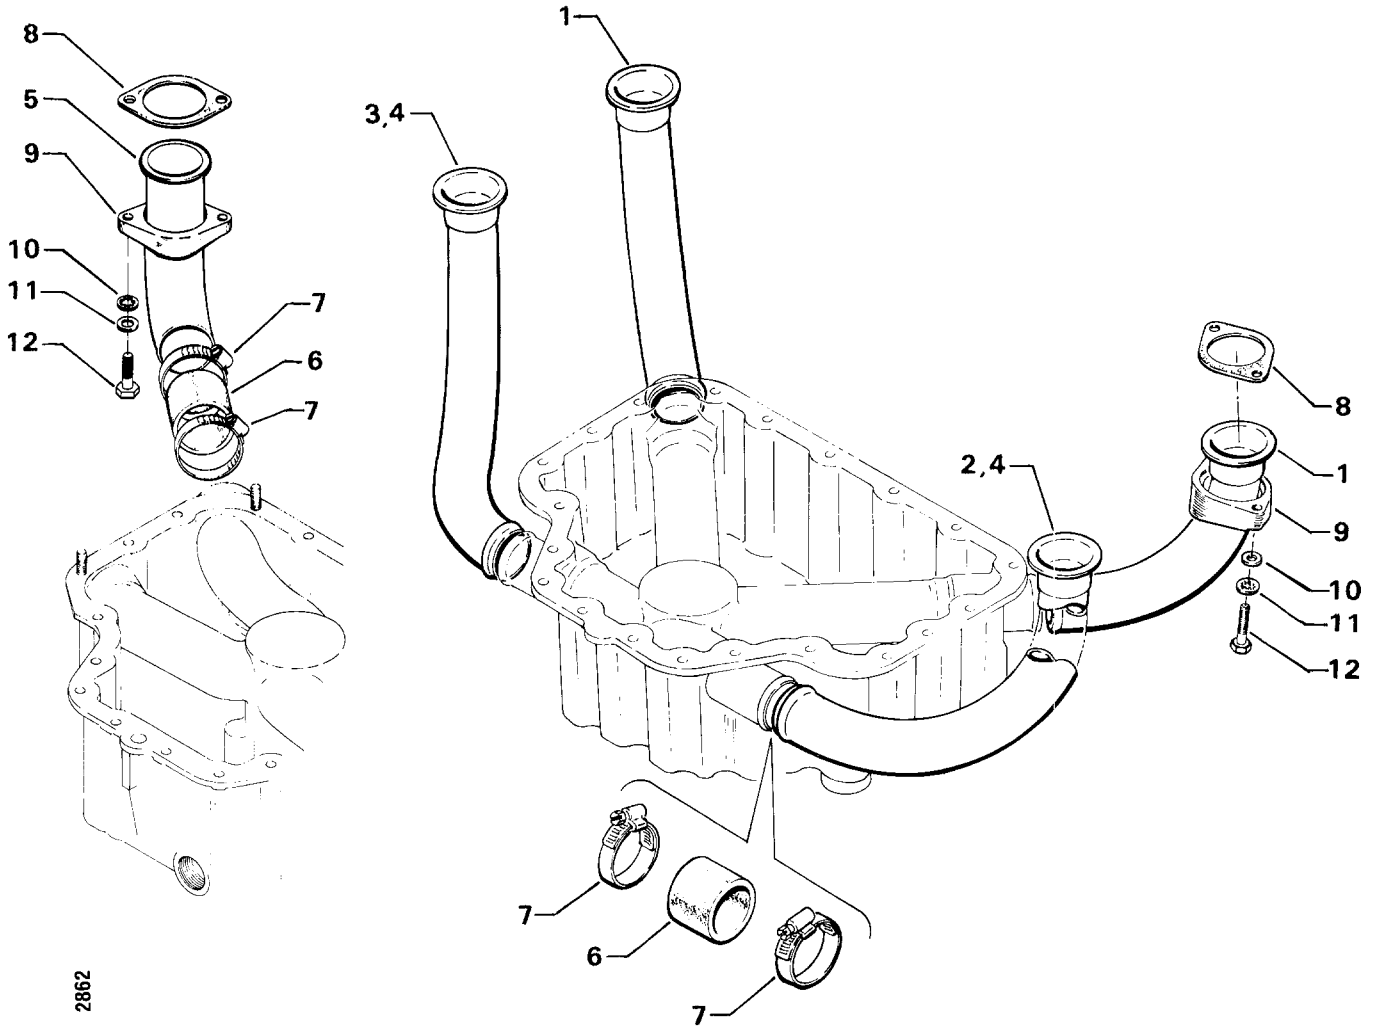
OIL SUMP ASSEMBLY AND OIL SUCTION SCREEN
